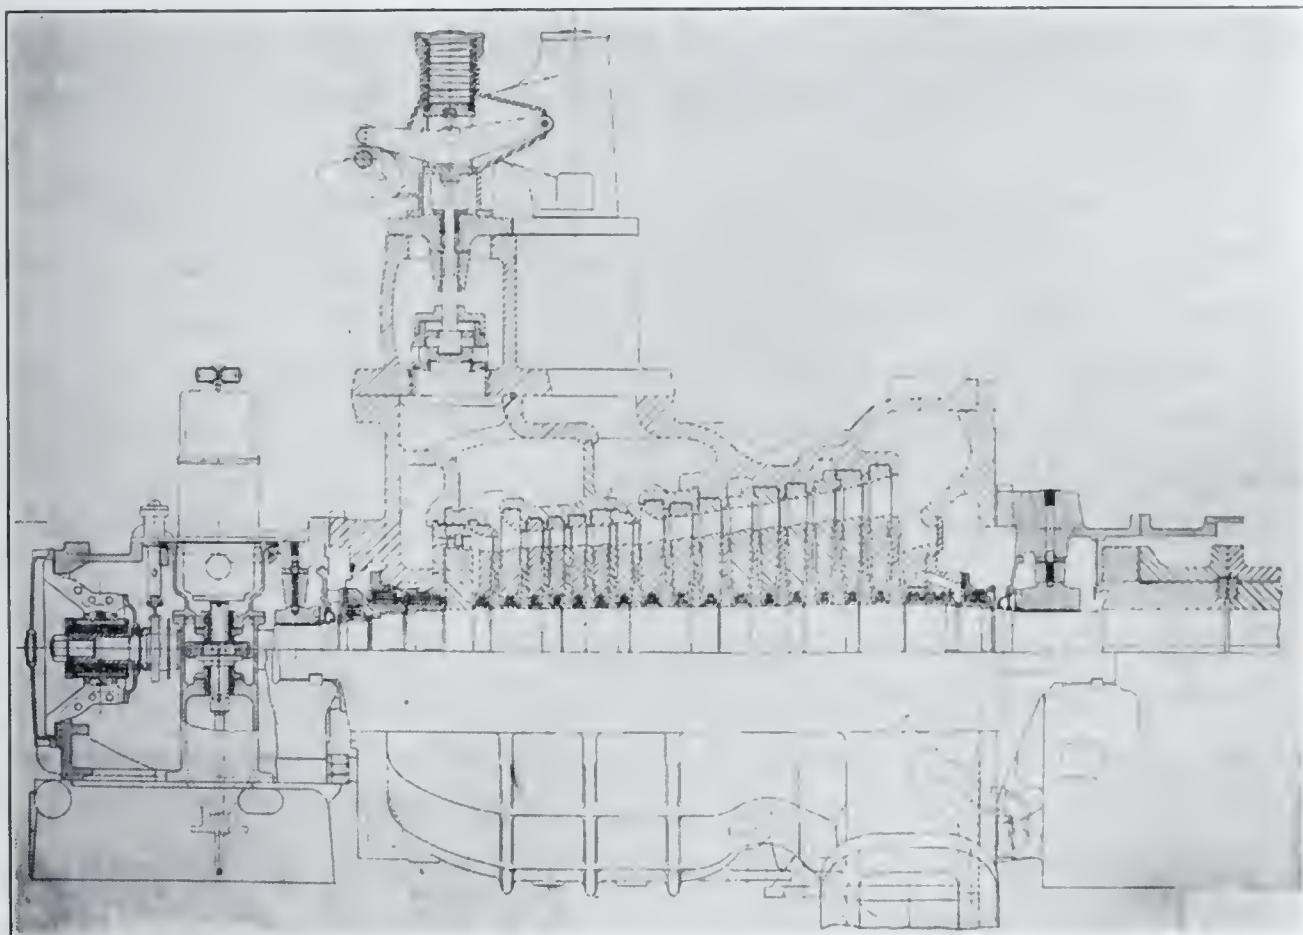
Section of 76,000-Kilowatt Steam-Turbine.
